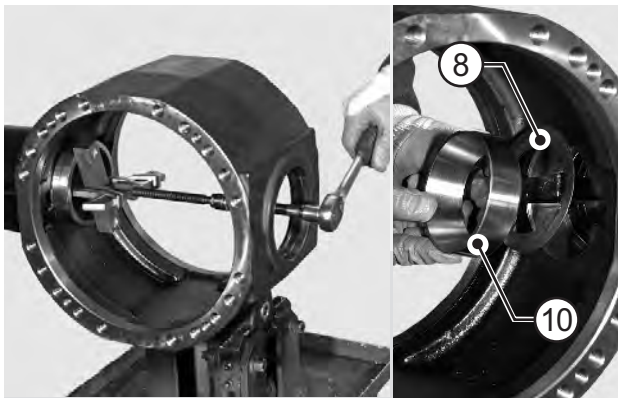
Remove the bearing cup of the internal bearing cone (10) as well as the shim washers (8).
